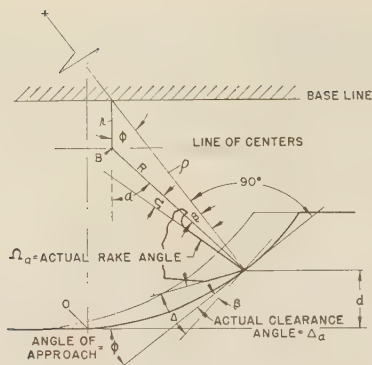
CLEARANCE AND RAKE ANGLES ALONG PATH OF MILLING-CUTTER TOOTH
